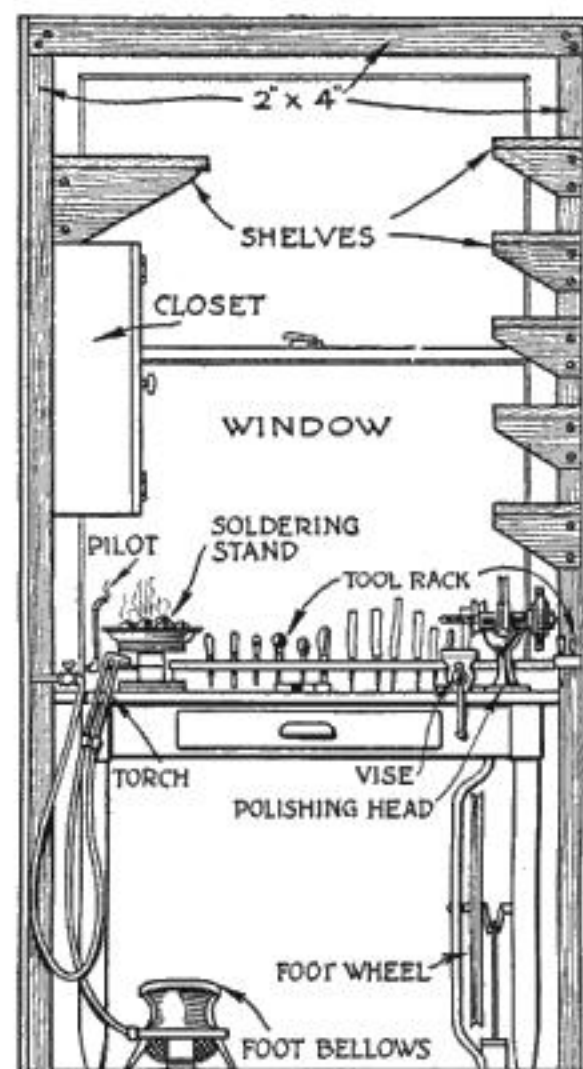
The main workbench with vise, soldering stand, polishing head, and tool racks
